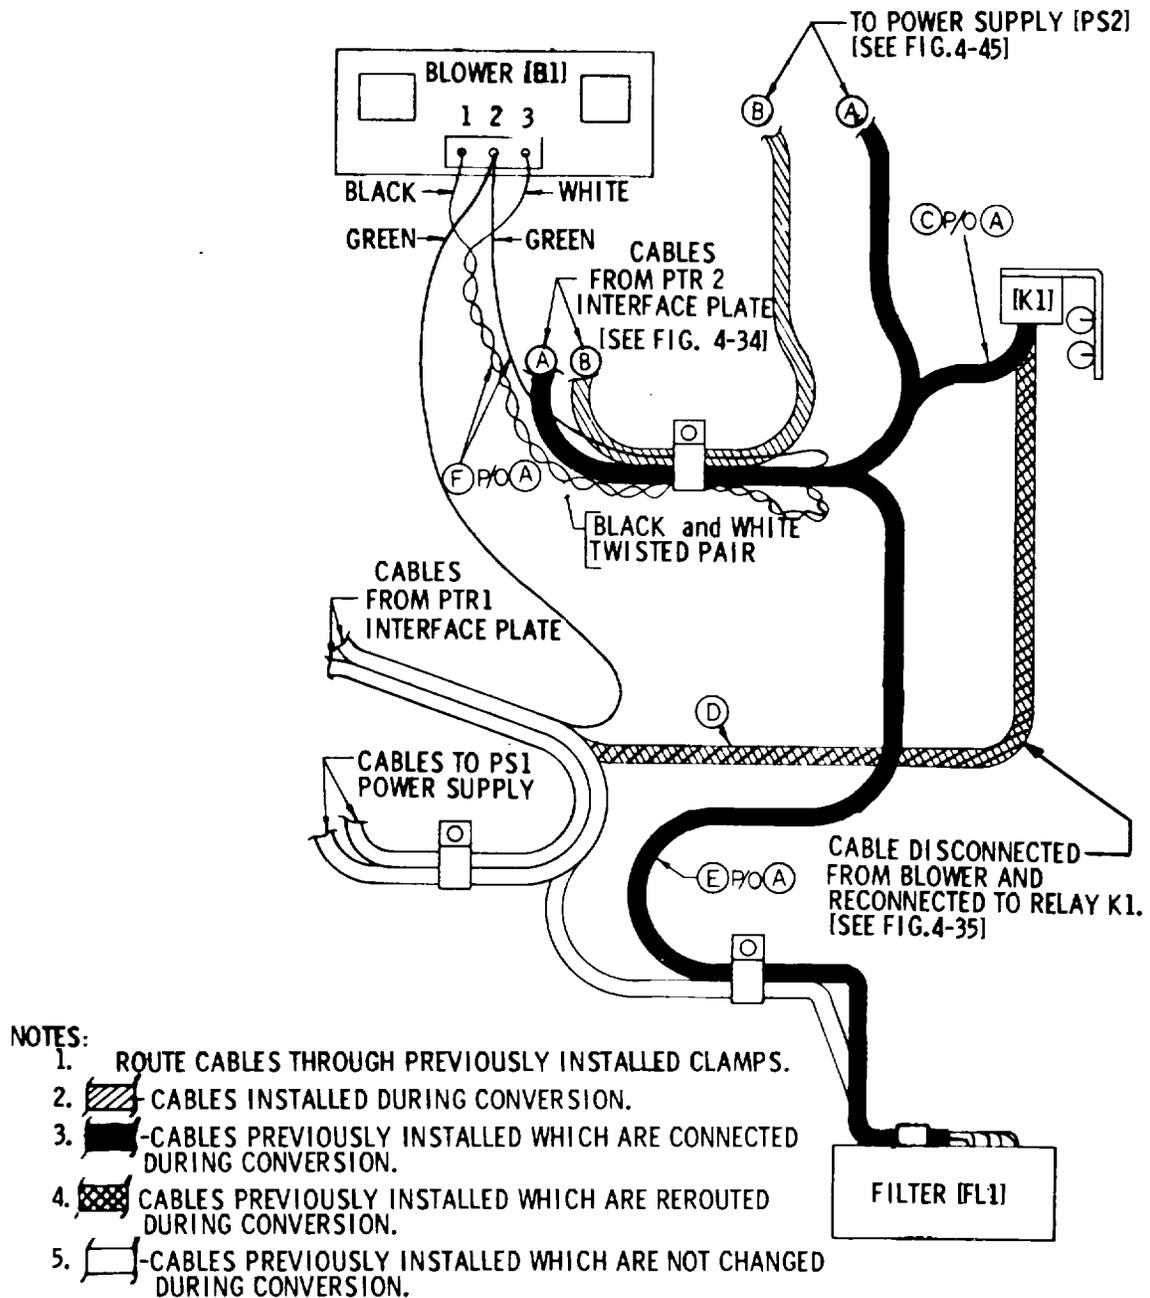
Filter assembly (FL1) wiring details and cable routing.
